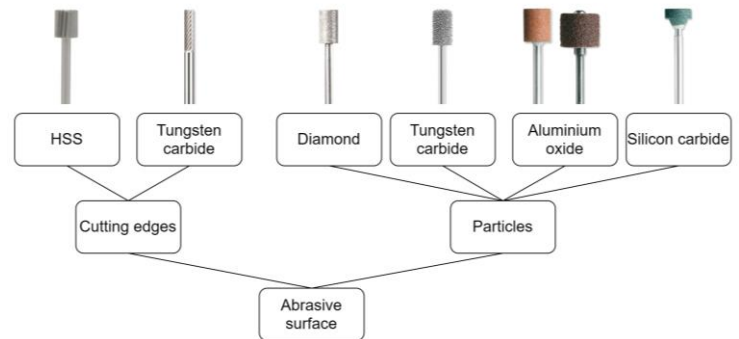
An overview of the selected Dremel cutting rotary tool accessories [33].
